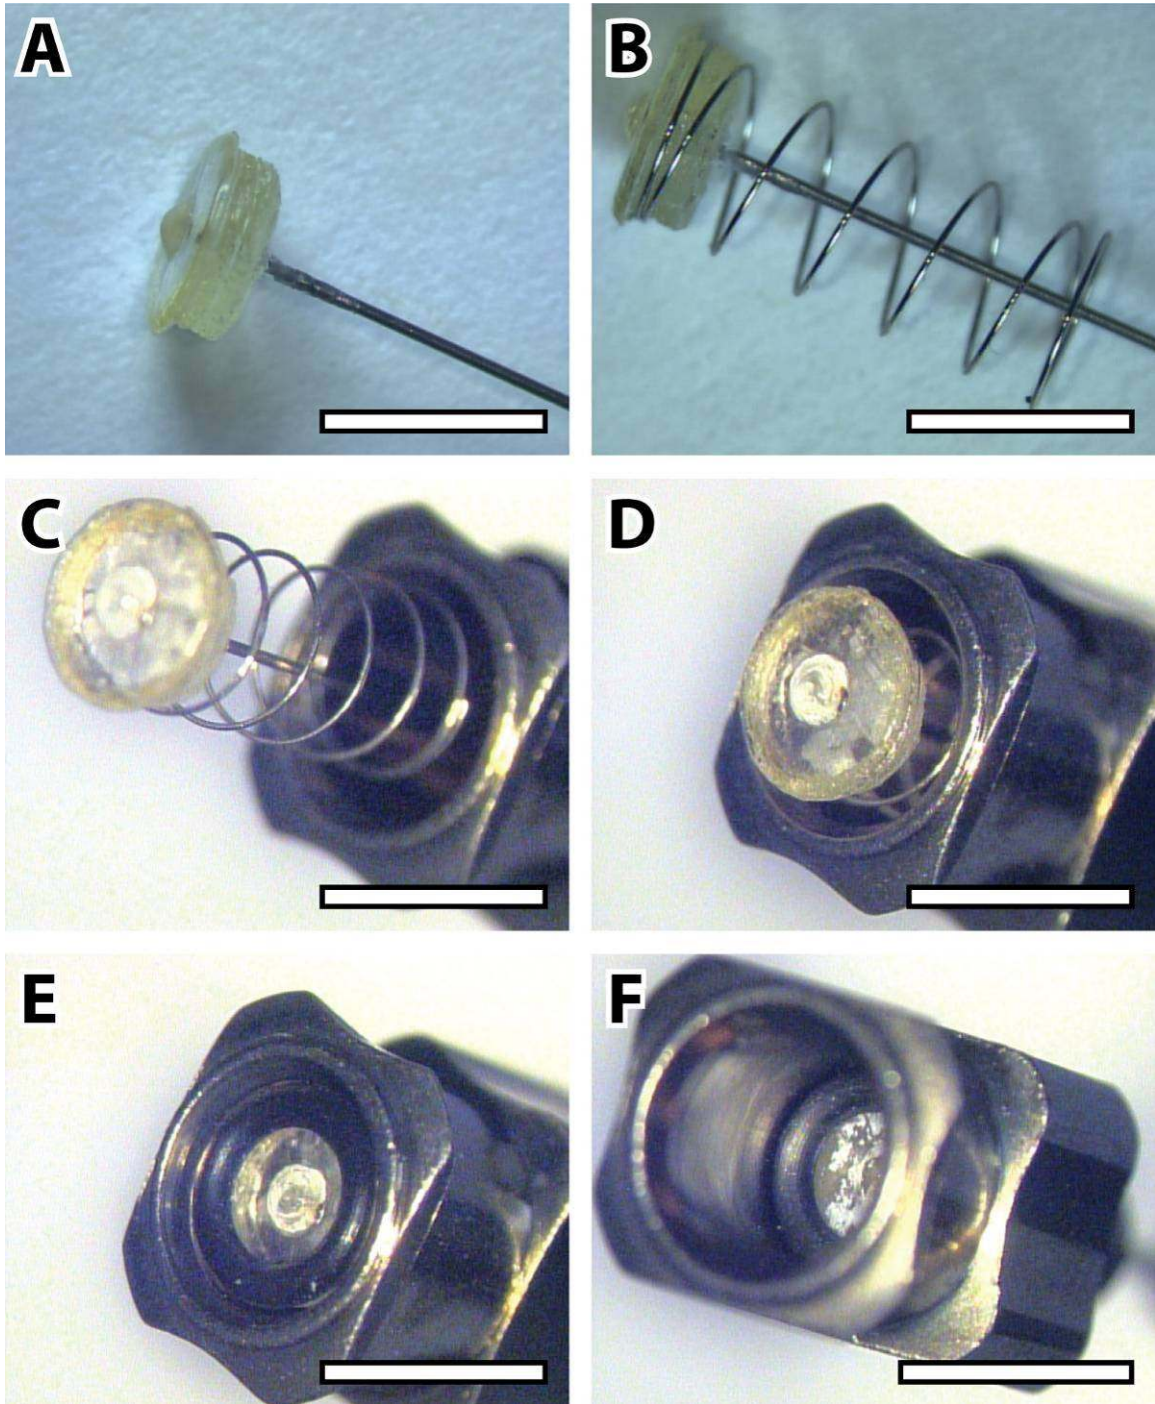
Bright-field photos of the assembly of process for the luer needle package. (A) The drive cable is inserted into the slot of the button and glued. (B) A spring is seated over the button sleeve, and the assembled button is inserted into the luer housing (C, D). (E, F) An o-ring is inserted to seat the spring-loaded button and act as a physical stop to ensure spring tension and to provide consistency in the button location. All scale bars are 1.0 mm.
